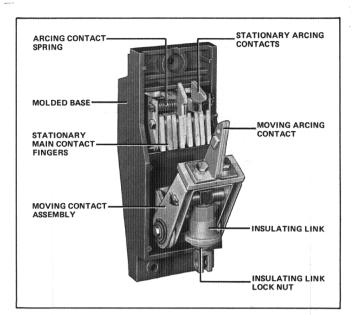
Type DS-416 Pole Unit Assembly - Front View
